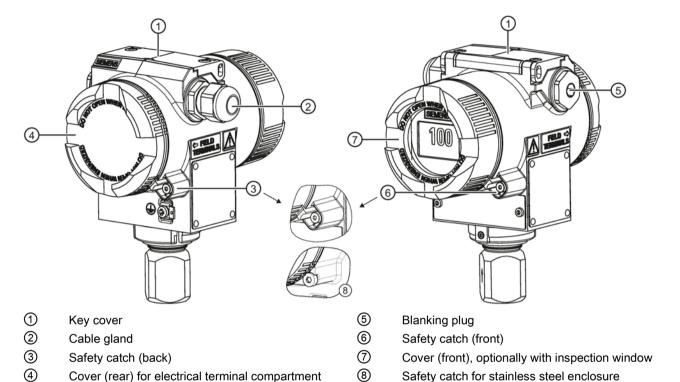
View of the pressure transmitter: Left: Back right: Front view
